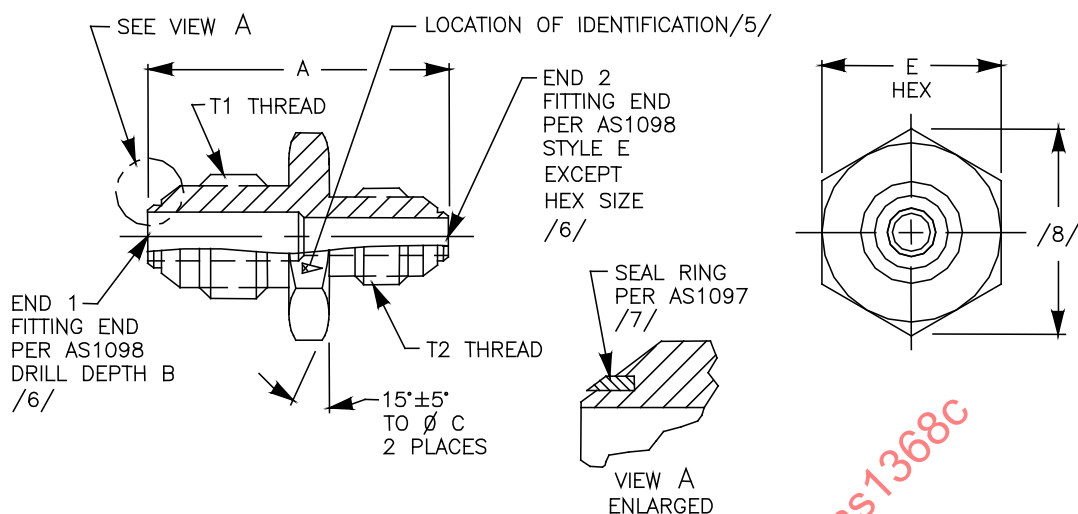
FITTING, REDUCER - EXTERNAL THREAD FLARED TUBE
